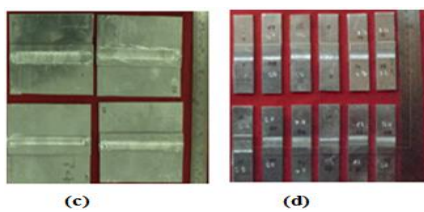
Photograph of FSLW joints and Fig. 1d. Photograph of tensile specimens (Before testing)
